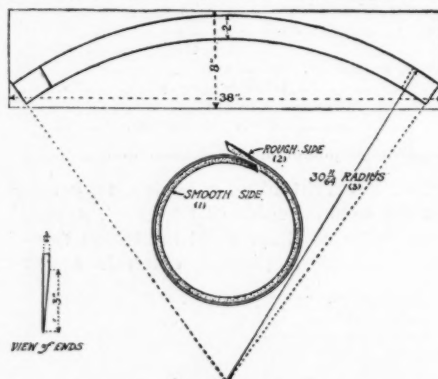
Pattern for cutting clutch leather for the Overland cone clutch
